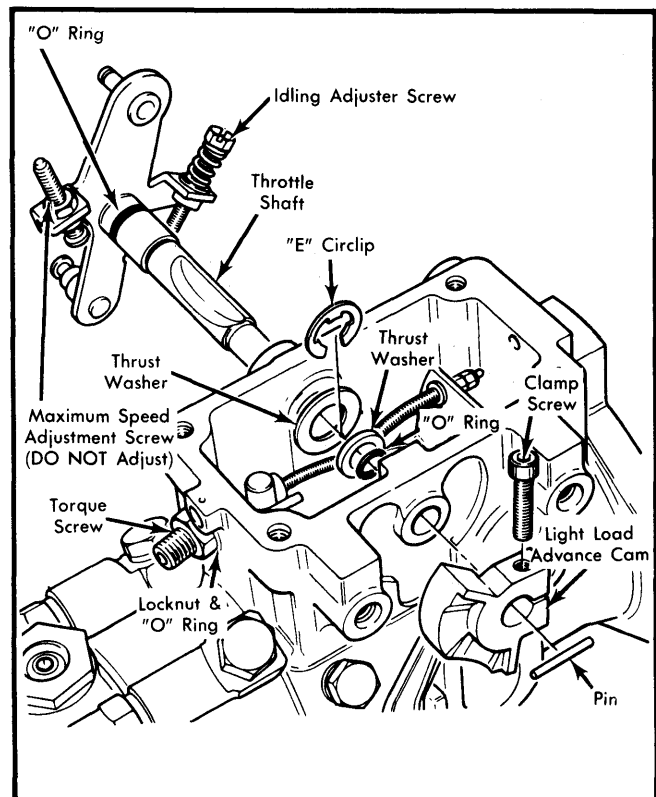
CAV Injection Pump Throttle Shaft and Seals
